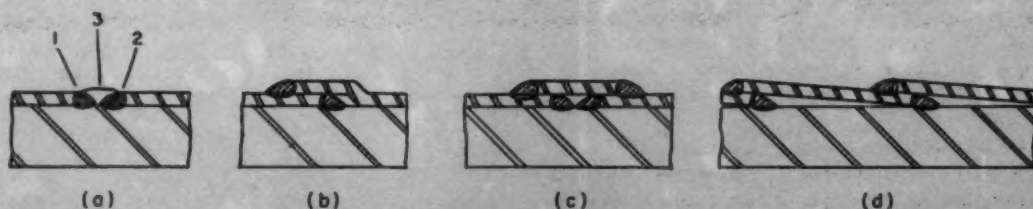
Principal strip lining methods: *a*, fillet-butt; *b*, cap or joggle; *c*, butt-strap; and *d*, shingle.
